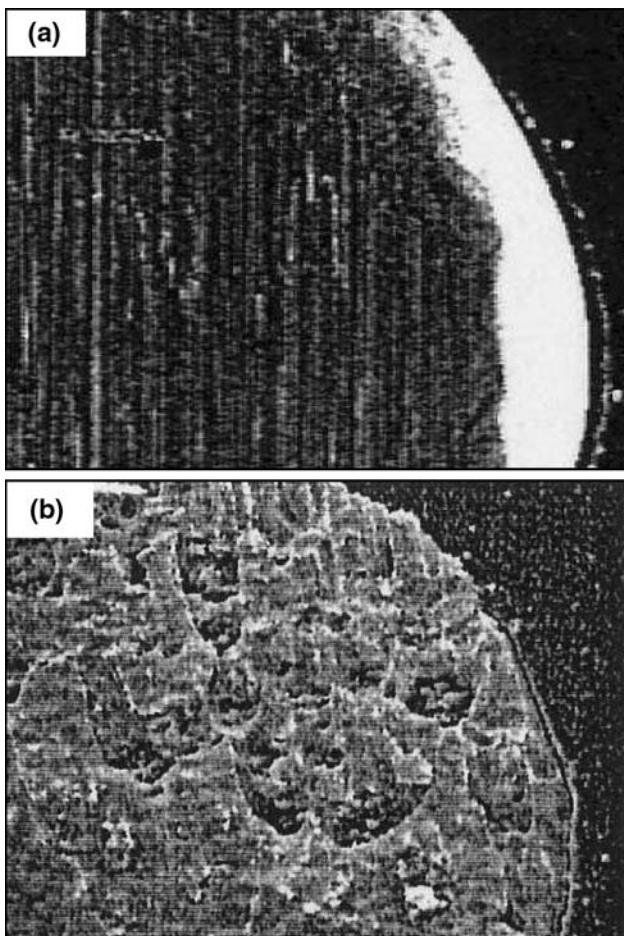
Fractography of as-reflowed In-3Ag solder joints in BGA packages with (a) Au/Ni/Cu and (b) Ag/Cu pads after ball shear tests
